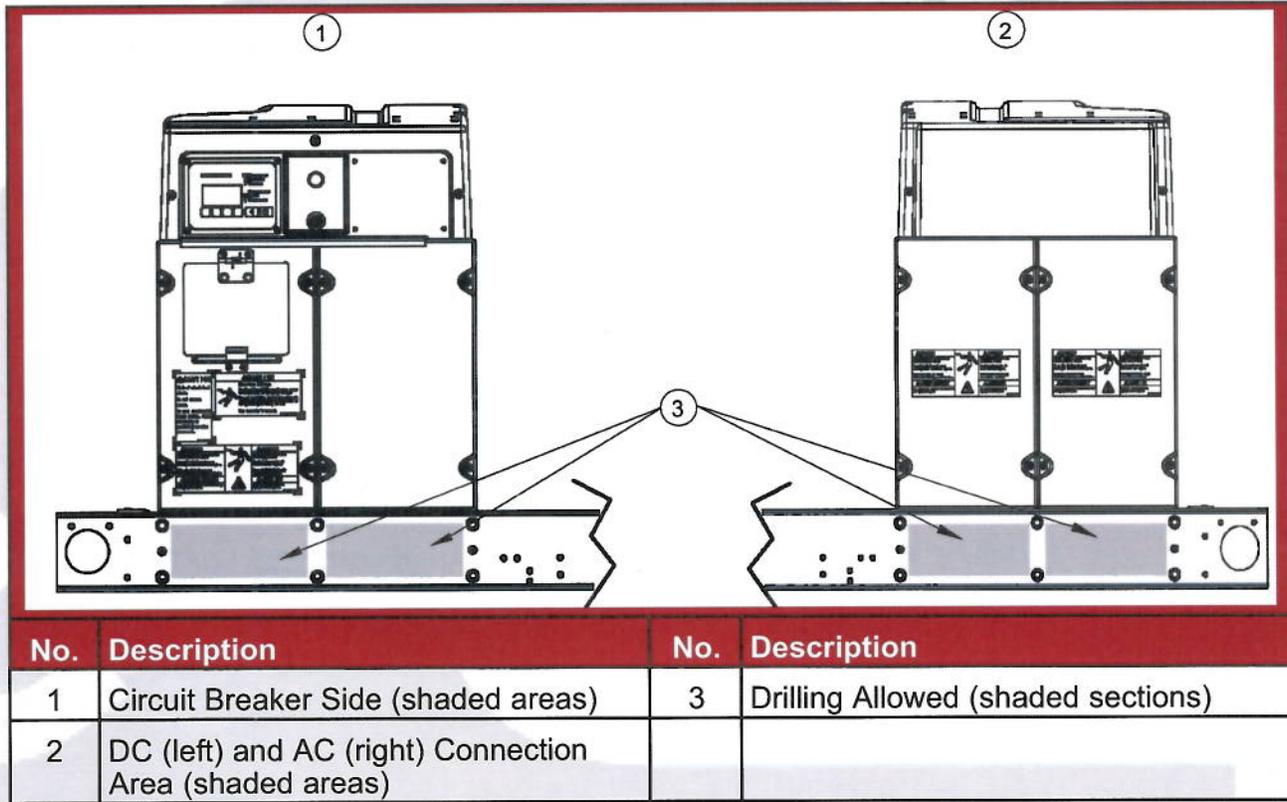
DRILLING LOCATIONS FOR SIDE ELECTRICAL CONNECTIONS
